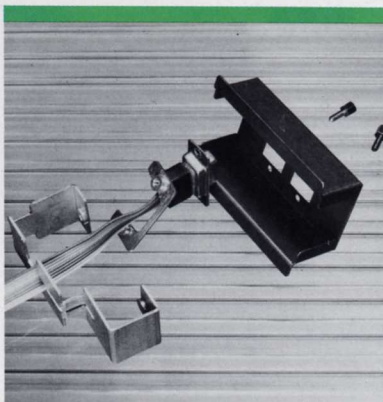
Thread connector and cable through opening in clamp and through nut plate.
